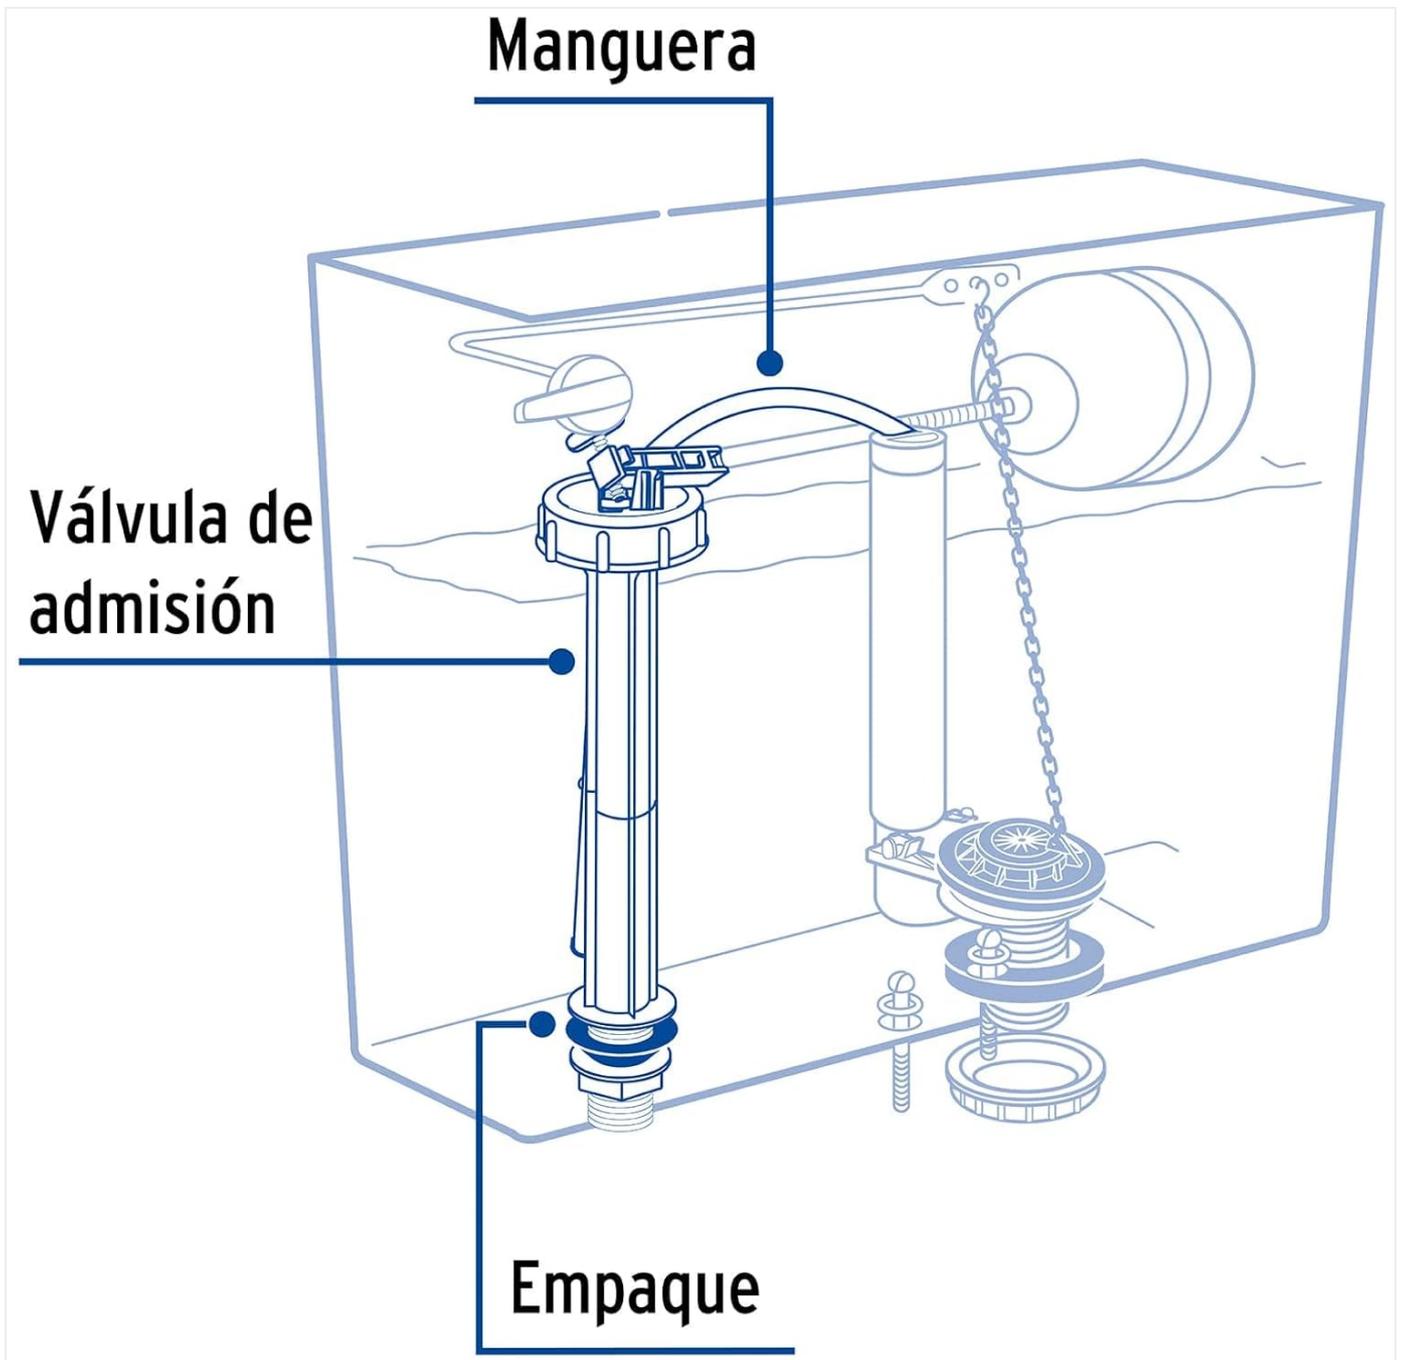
Illustrative diagram showing the filling valve (Válvula de admisión) installed within a toilet tank, with the hose (Manguera) and gasket (Empaque) indicated.
